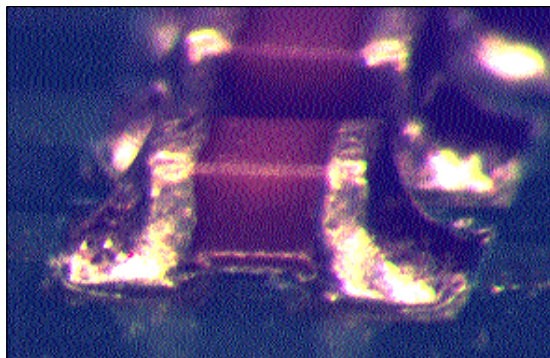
Soldering Results from 0201 Assembly Process on Attachment Pad Design BEG
